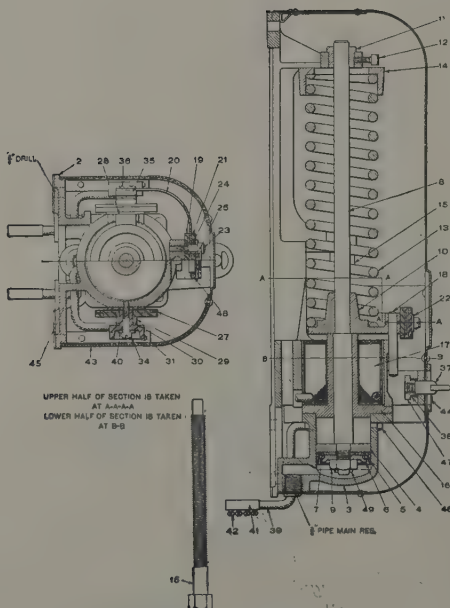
Electric Compressor Governor, Type G-1-B.
